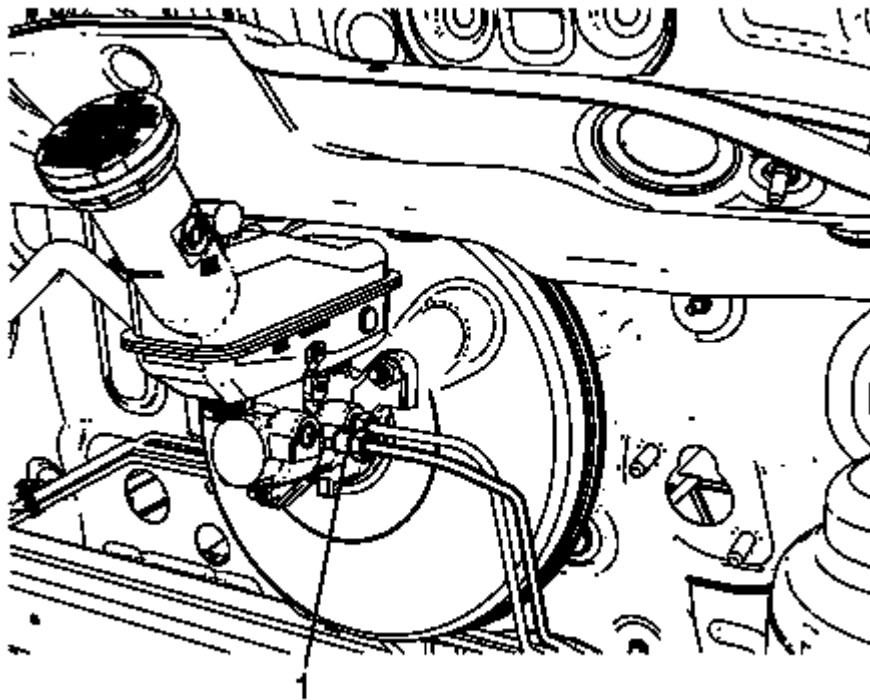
Master Cylinder Secondary Brake Pipe Fitting
